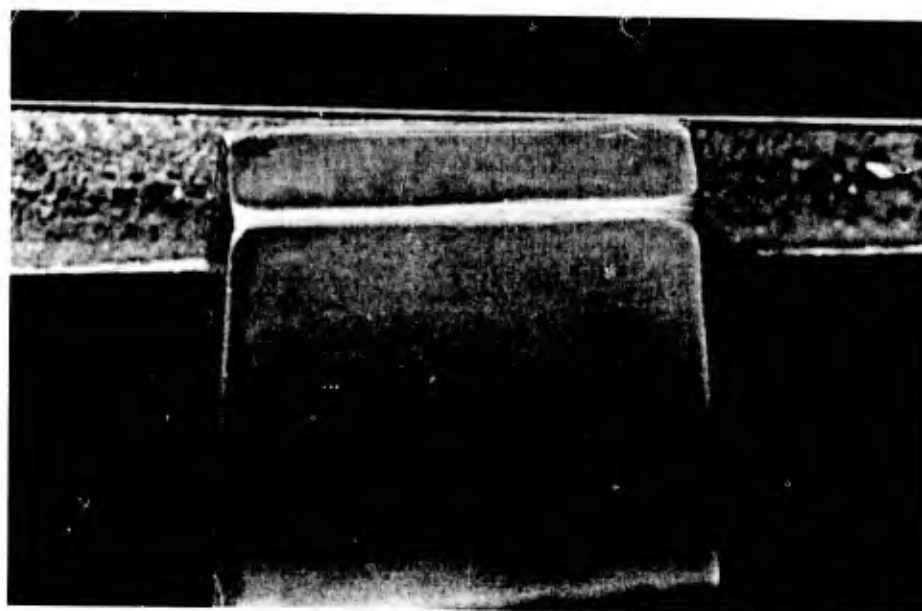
Tooth No. 8 of AISI 9310 Steel Test Gear (SK21984, Serial No. 1, as received)
